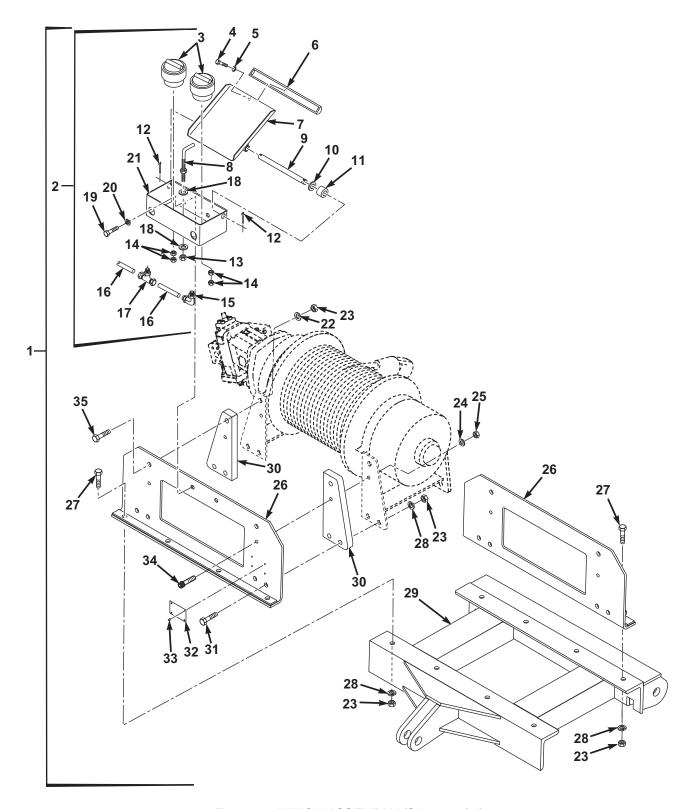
WINCH ASSEMBLY (Sheet 1 of 5)
